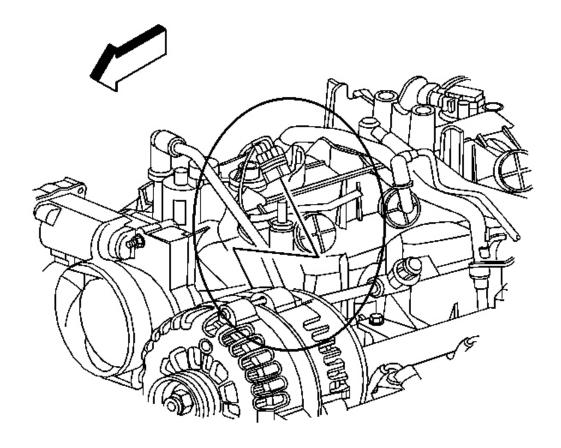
View Of Generator Electrical Connector Courtesy of GENERAL MOTORS CORP.
